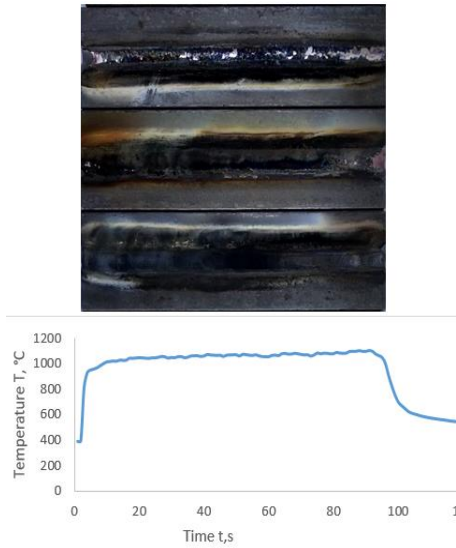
Macrographs of FeCrC based composite coatings and welding thermal cycle
